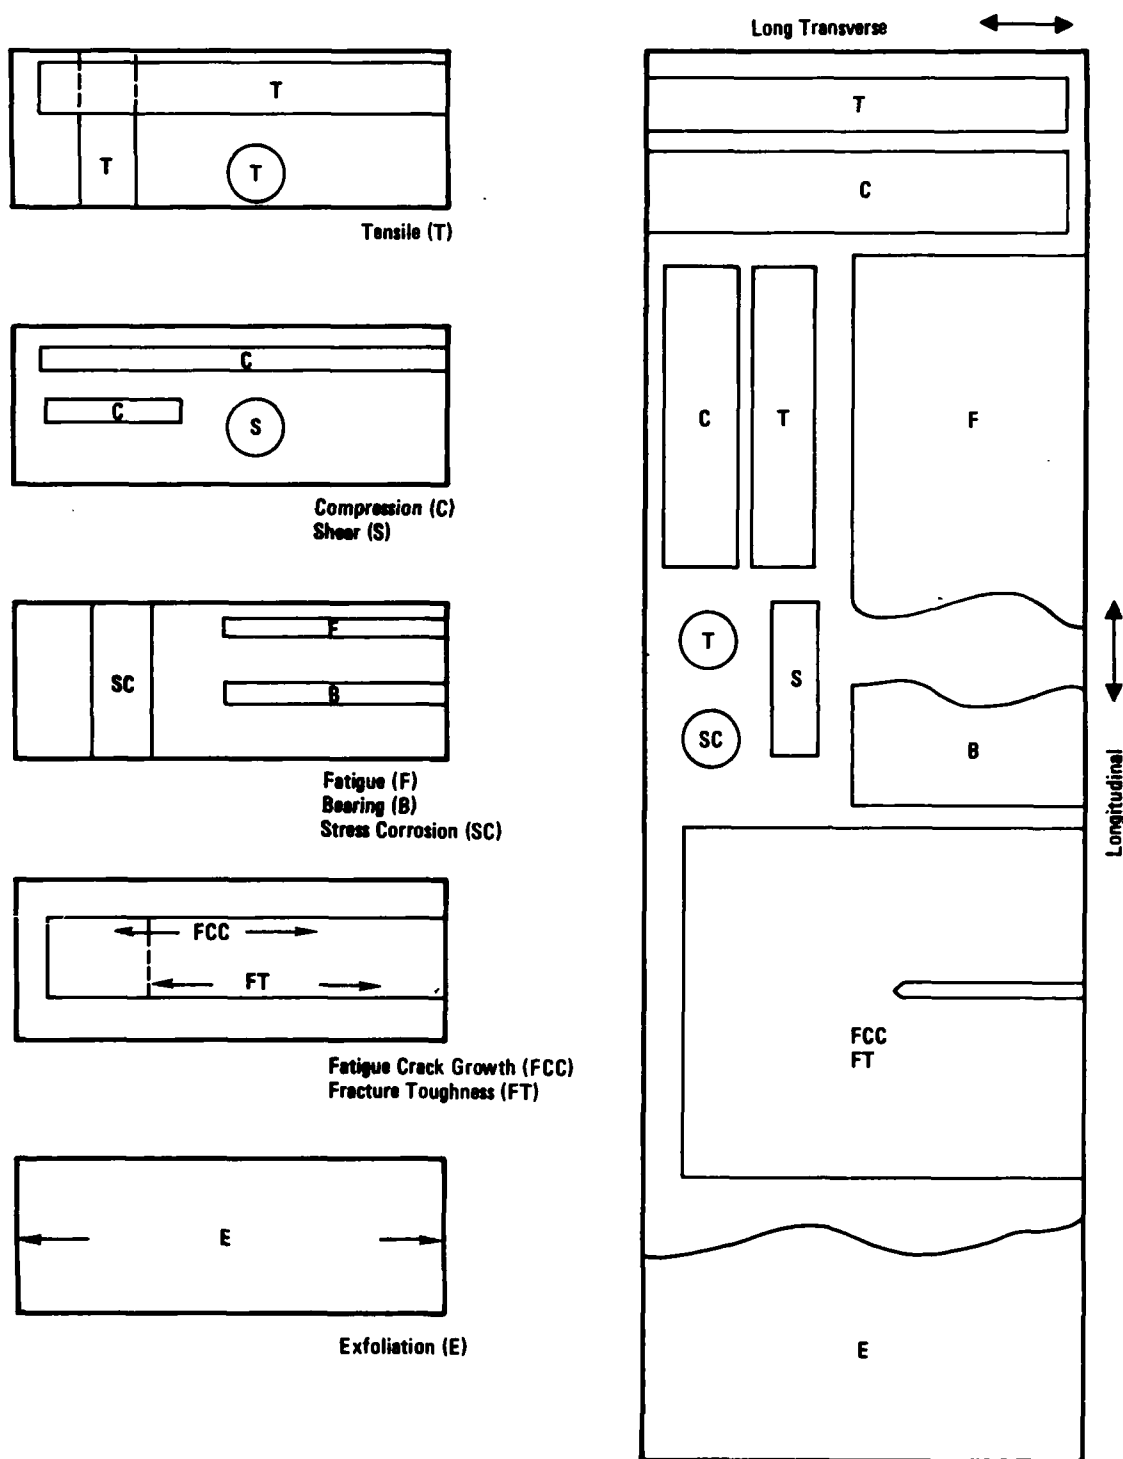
Schematic of test specimen layout for flanged cap - base, LS 13116. (Not to scale)
